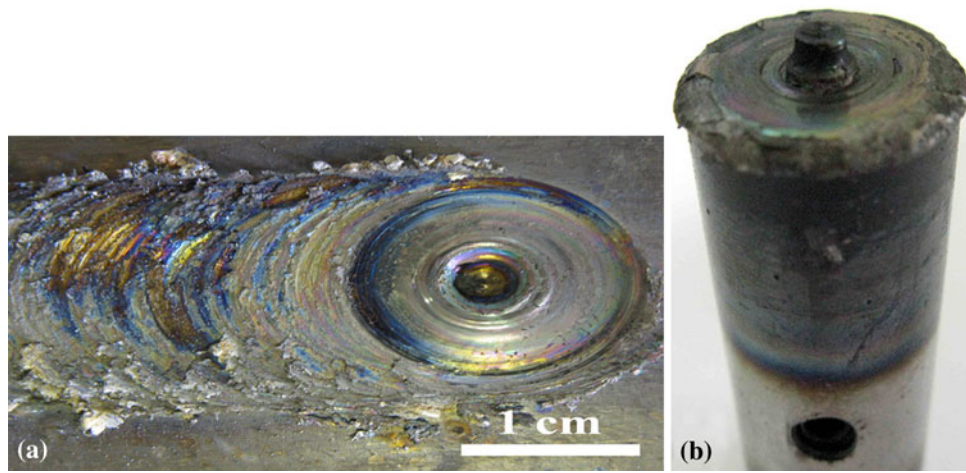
(a) Photograph of the joint surface formed under the condition 2; (b) Tool under the condition 2 with WC pin and HSS shoulder at the end of FSW process
